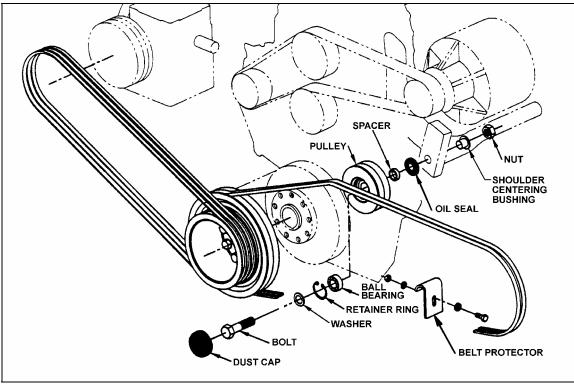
A/C COMPRESSOR DRIVE INSTALLATION
